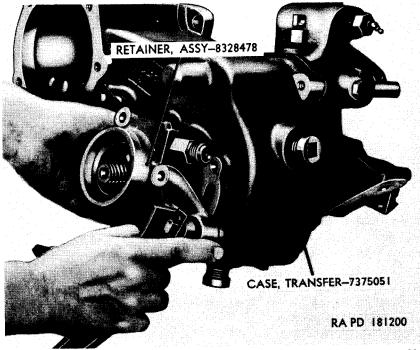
Removing transfer rear axle output shaft retainer with bearing assembly.
